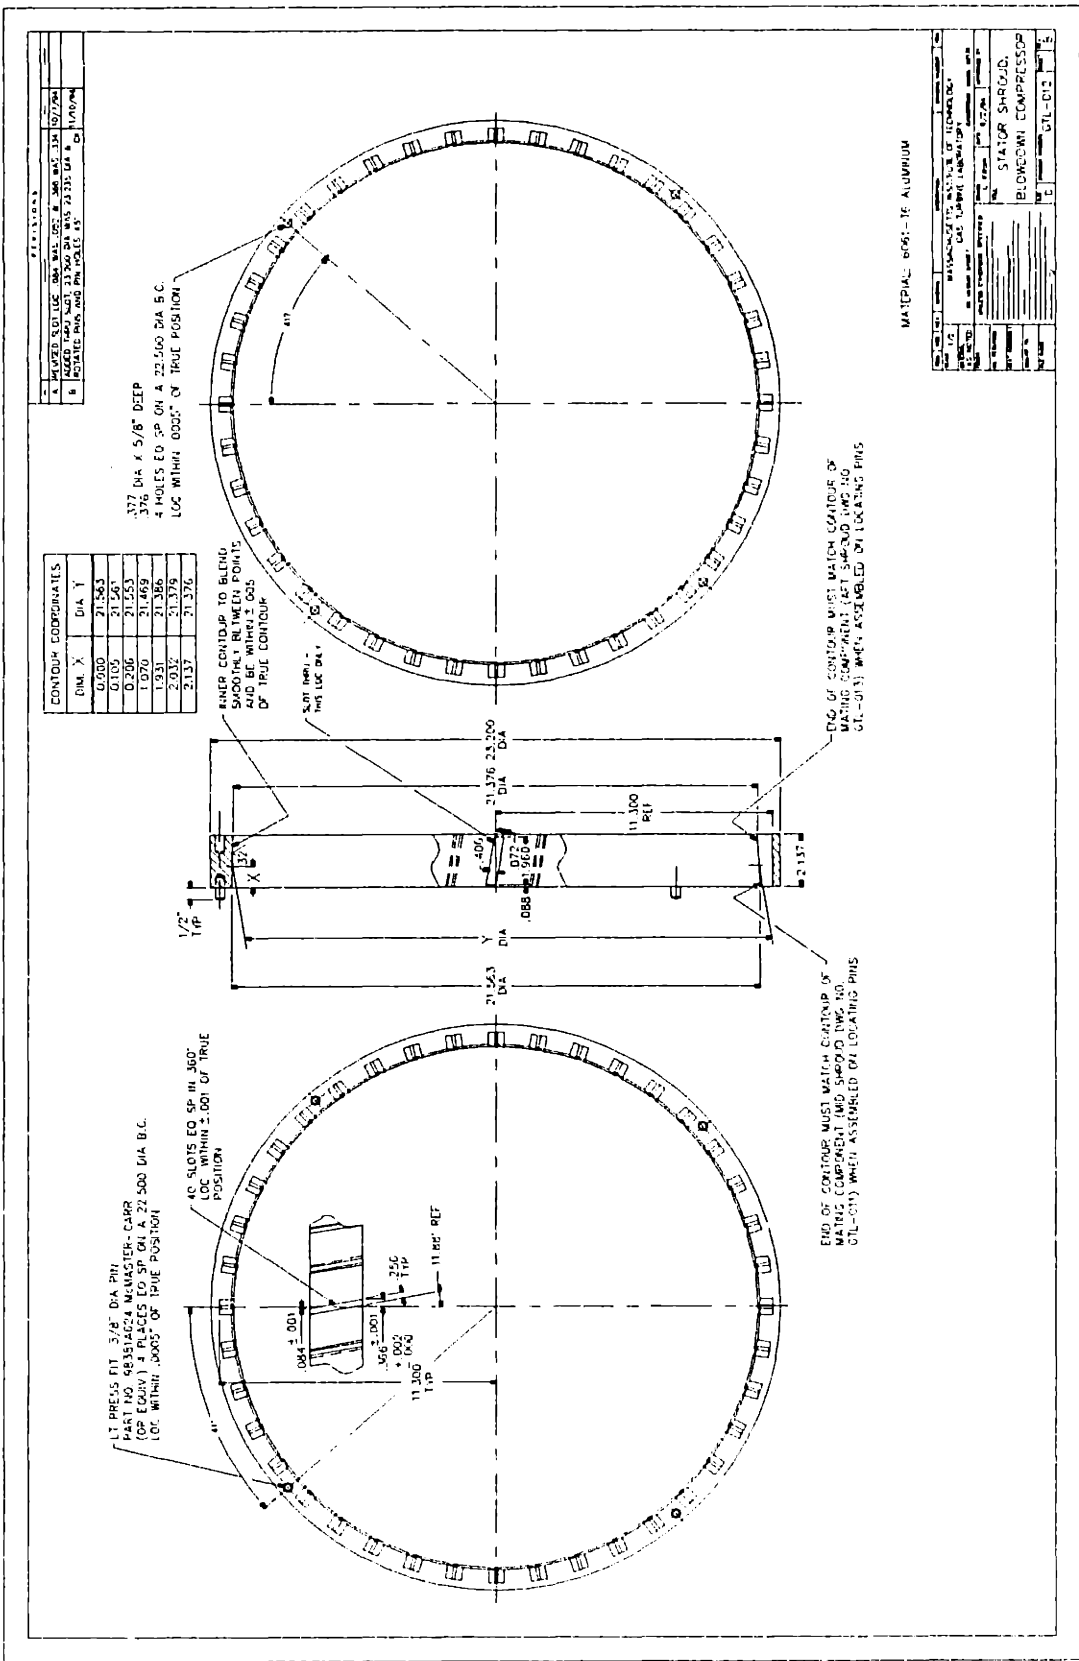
Fan stage drawing (GTL-012): stator shroud ring
